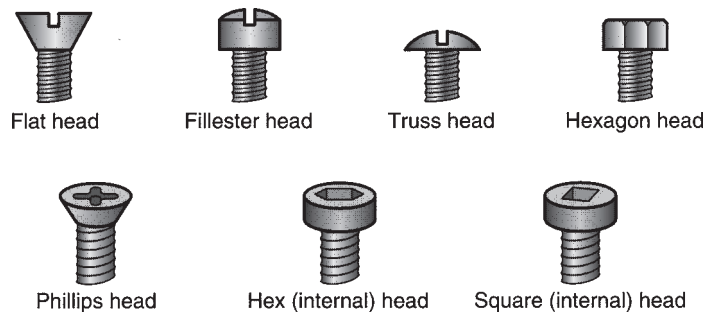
Various head styles available on screws and bolts. There are additional head styles not shown.
